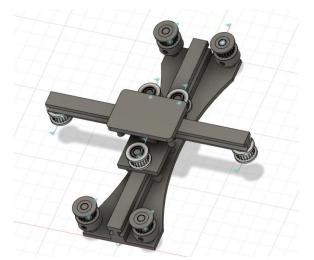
CAD model of the Inverted H-Bot assembly in Fusion360
